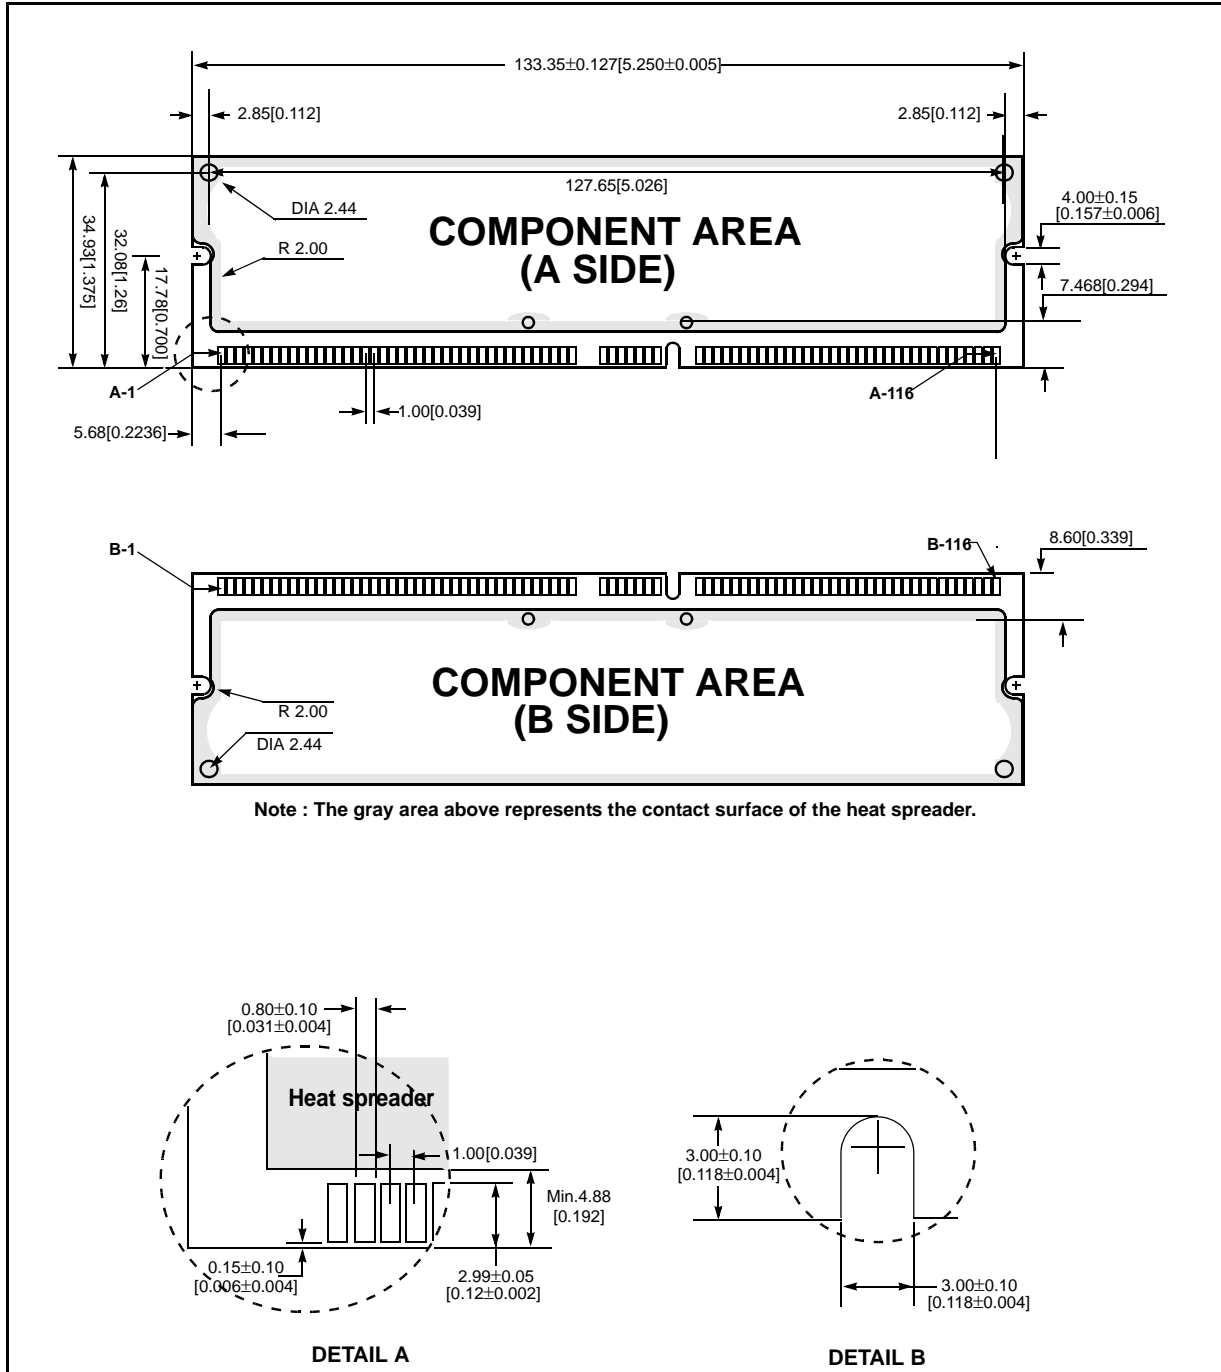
32 Bit RIMM Module PCB Physical Dimensions
